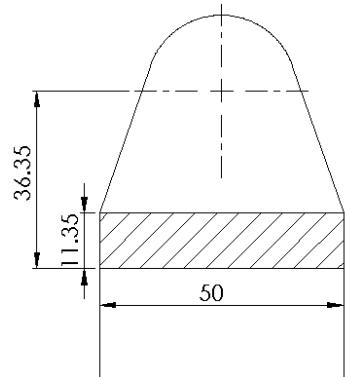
, bottom side view of heel, hatched area showing section used to overestimate deflection, dimensions in millimeters
